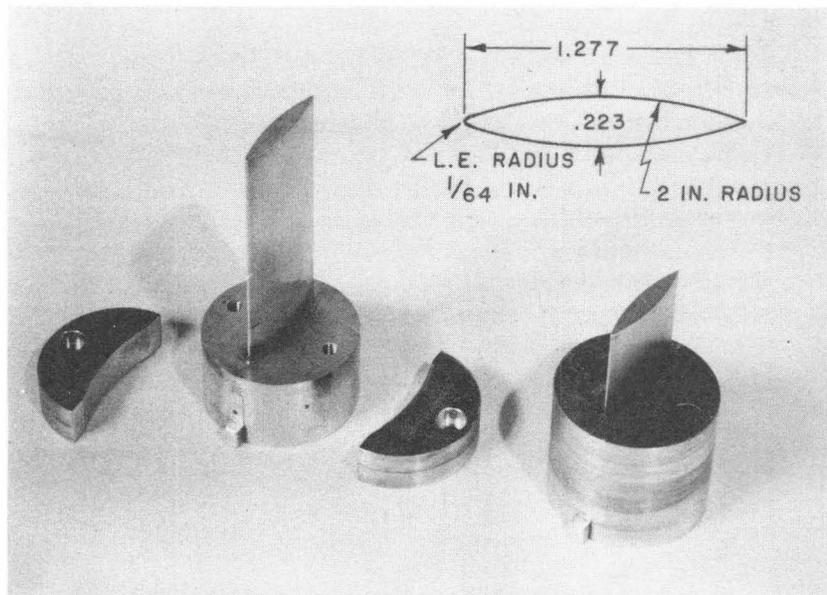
17.5% thick symmetrical lenticular section hydrofoils used in this experiment. The side cheeks have been removed from the larger model to minimize spray interference at the free surface.
